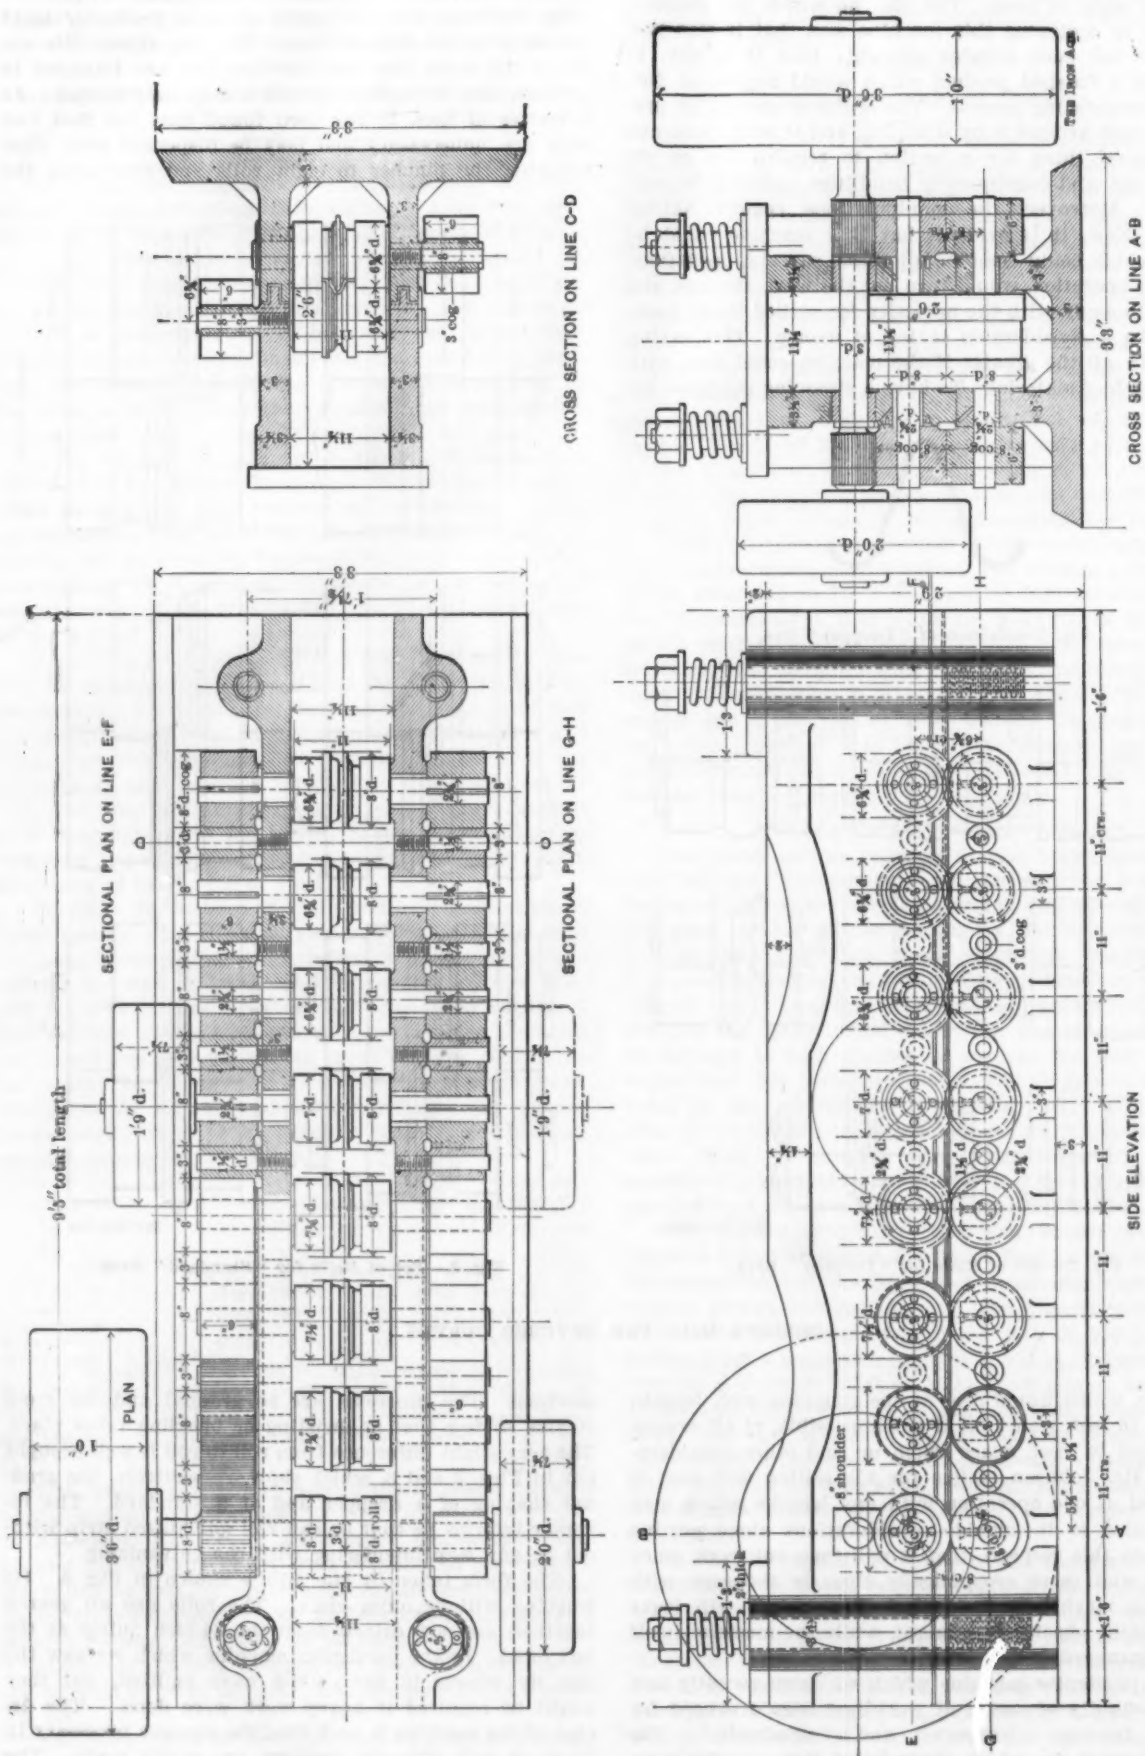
Side Elevation and Sectional Plan and Elevations of Mill for Rolling Reverse Curves.
